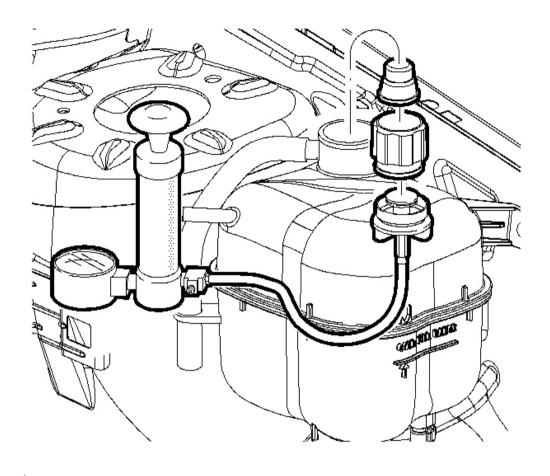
View Of SA9141E & J 42401 Courtesy of GENERAL MOTORS CORP.
